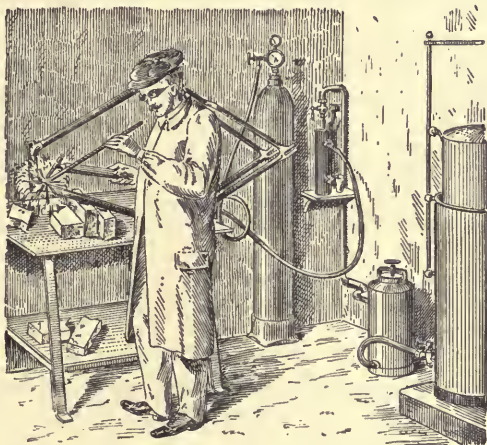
Autogenous welding by oxy-acetylene.
